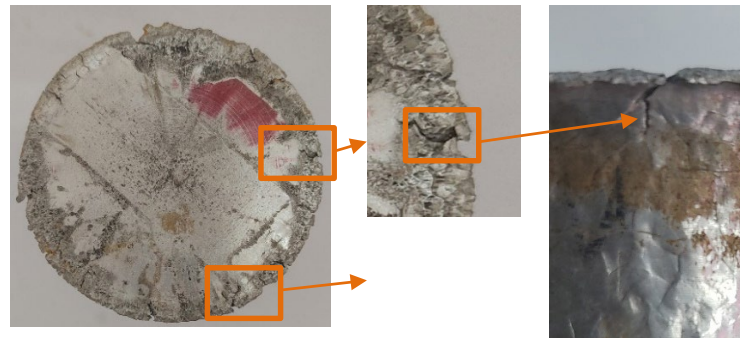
Cracking discovered on specimen A surface for 100 gram explosives
